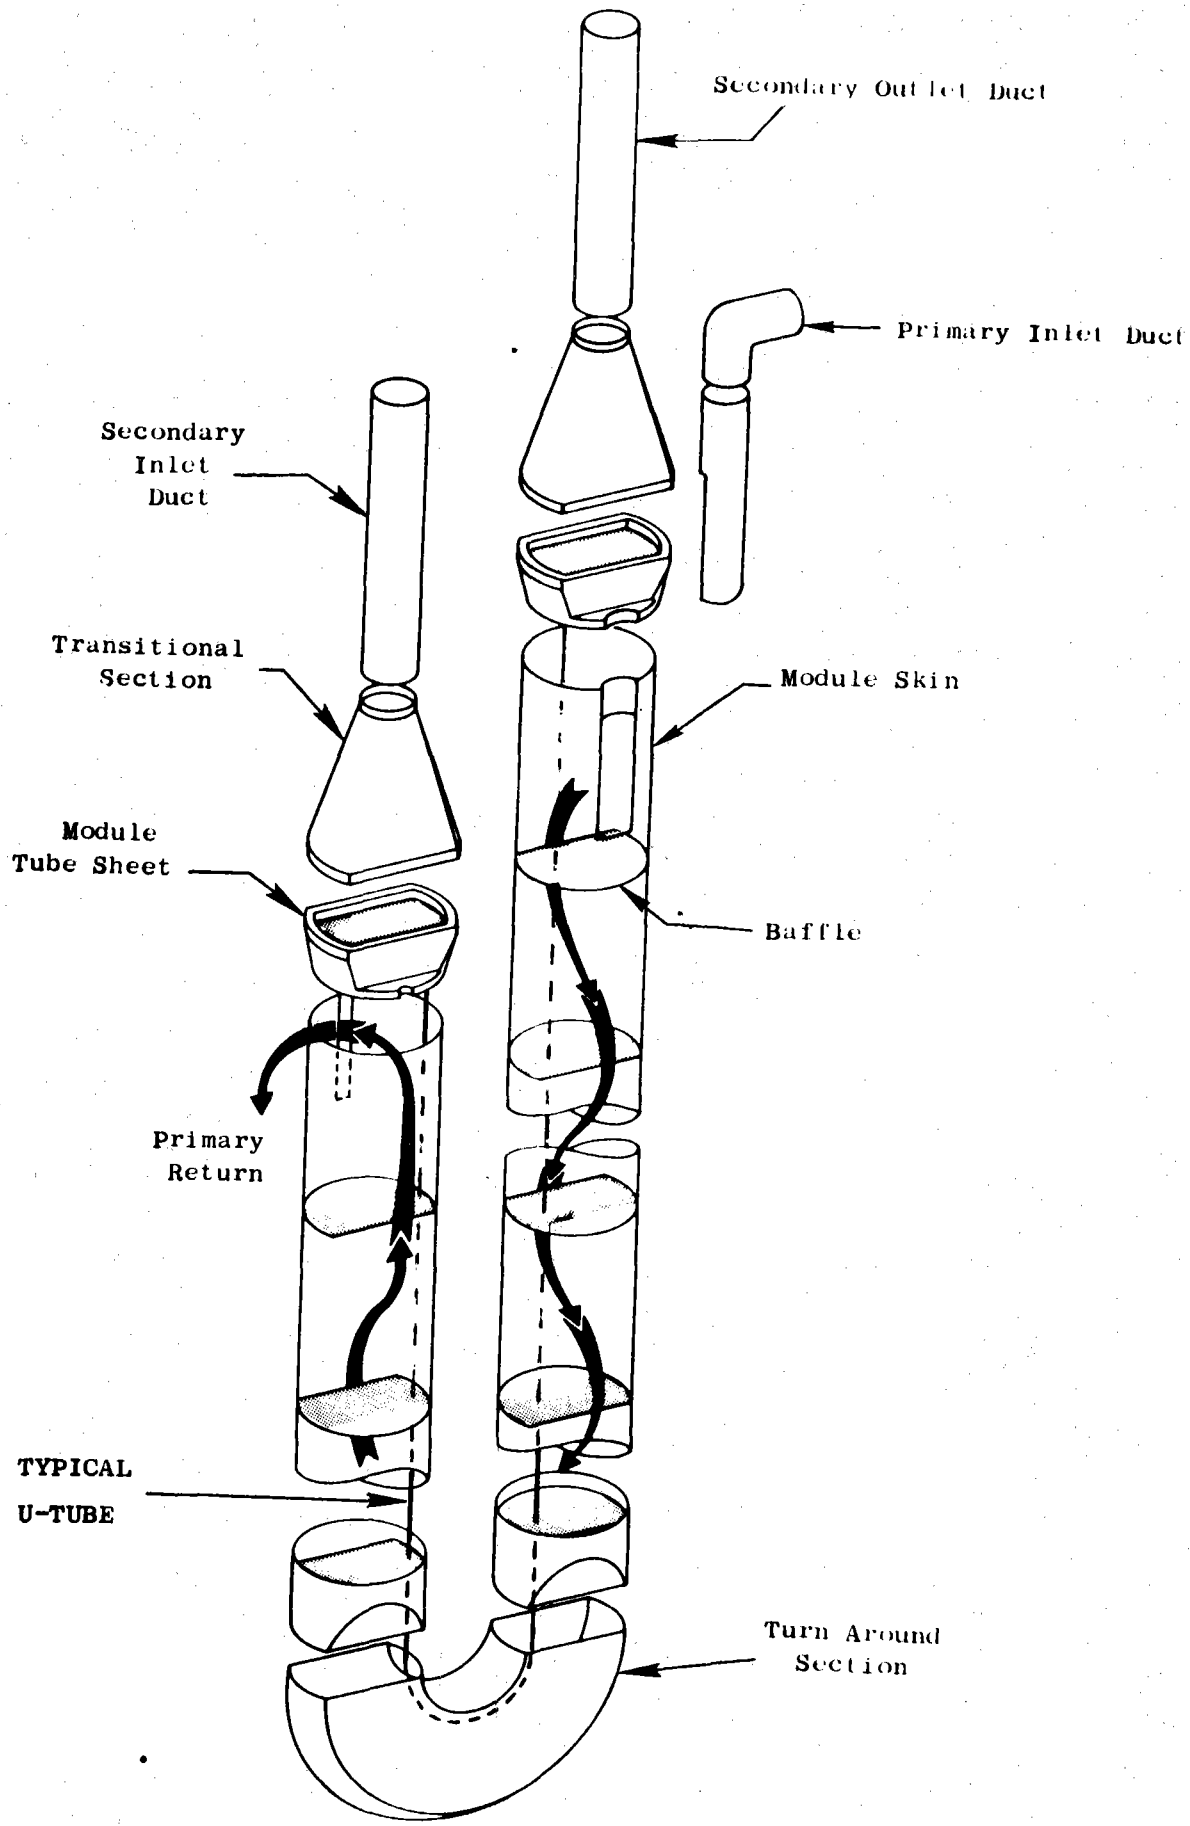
Exploded Parts View of U-tube IHX Module (Reference Design)
